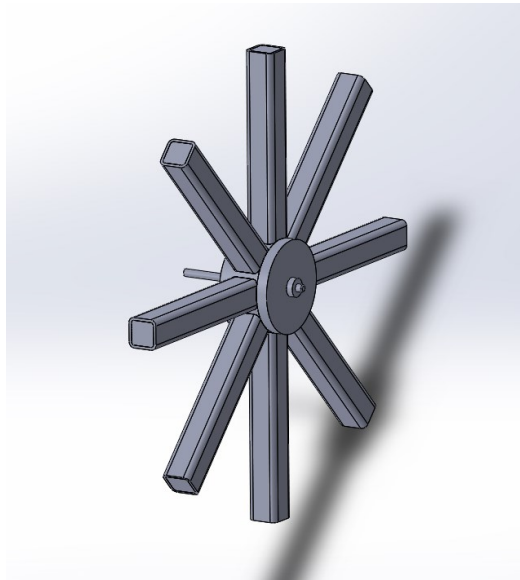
Full CAD model of turbine with 50.44mm cross section blades.
